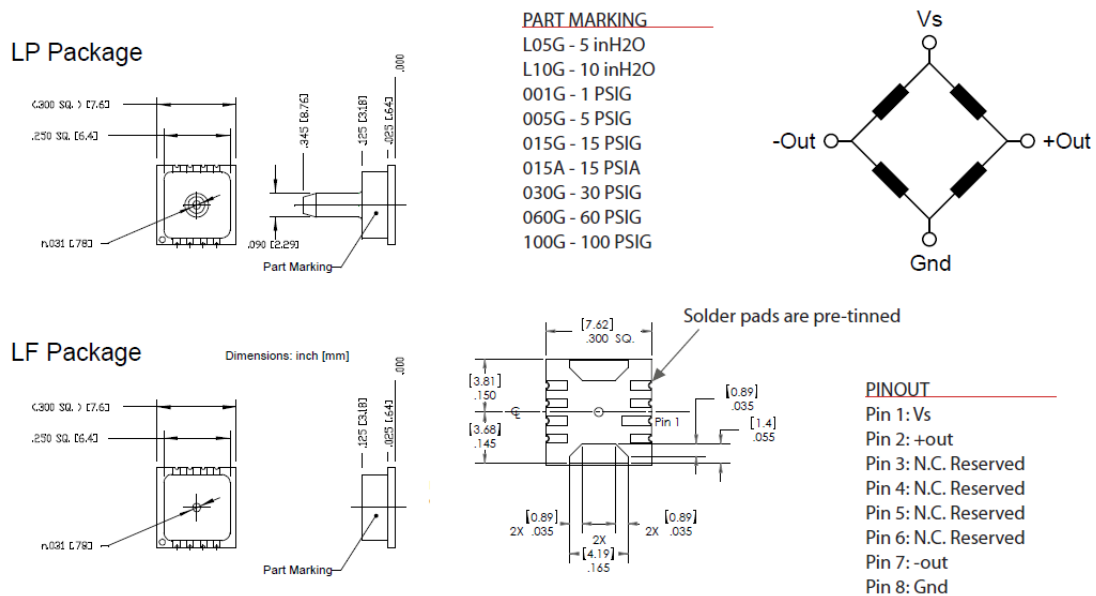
Pressure Sensor physical dimension (left) and equivalent circuit (right)
